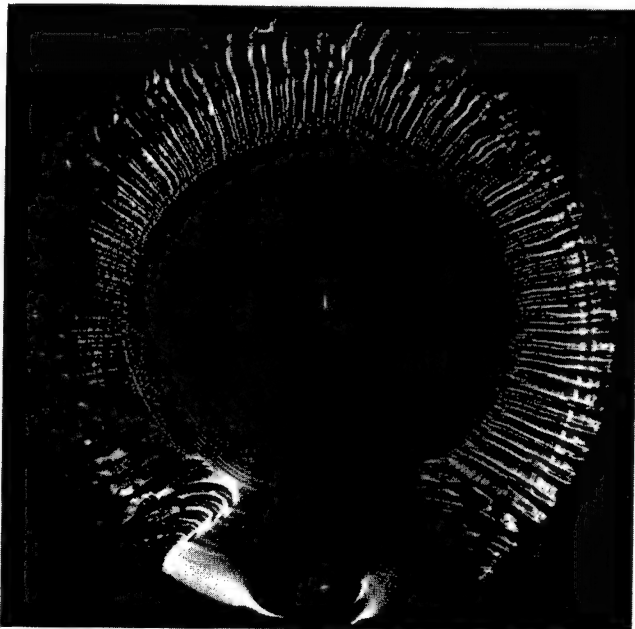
Fracture surface of a glass rod broken under tension and torsion [9]
